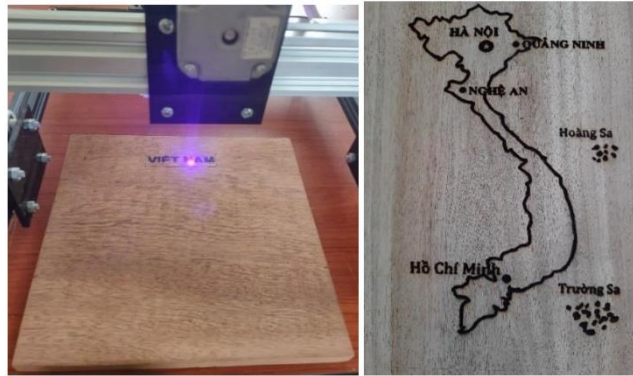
A product of a CNC laser engraving machine engraved on a wooden surface.
